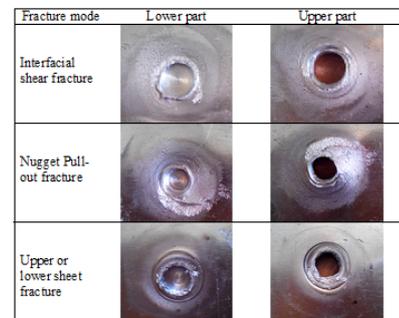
Photographs of failure surfaces show the typical failure modes of test specimens.
